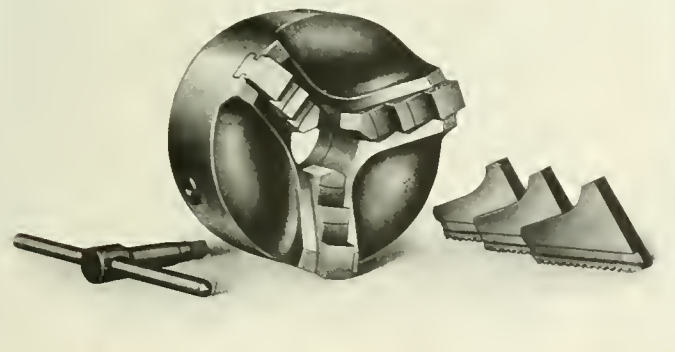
High-duty Chuck placed on the Market by Schuchardt & Schutte held while being rough-turned. A view of the "Columbia" chuck, dismantled, is shown in Fig. 2.
